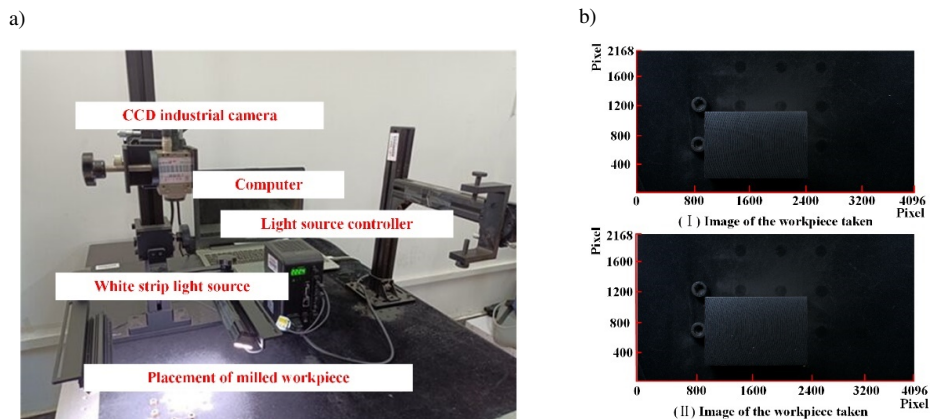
Experimental apparatus and milled workpieces. a) Experimental apparatus. b) Images of the workpieces taken by the CCD camera.
